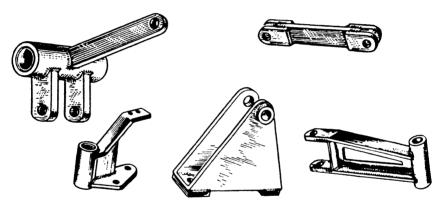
Parts fabricated from flat stock and tubing (Courtesy of: Lincoln Electric Company)
